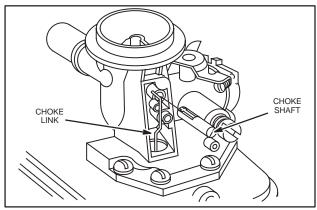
REMOVING AUTOMATIC CHOKE, TYPICAL
